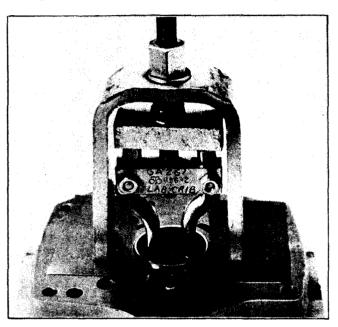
Removal of Bearing Race (48) from Valve Block (33).
